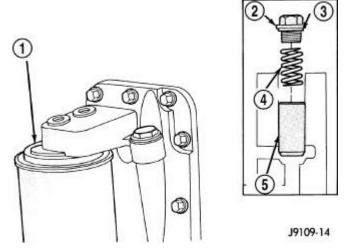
Oil Filter & Oil Pressure Relief Valve Courtesy of CHRYSLER GROUP, LLC
